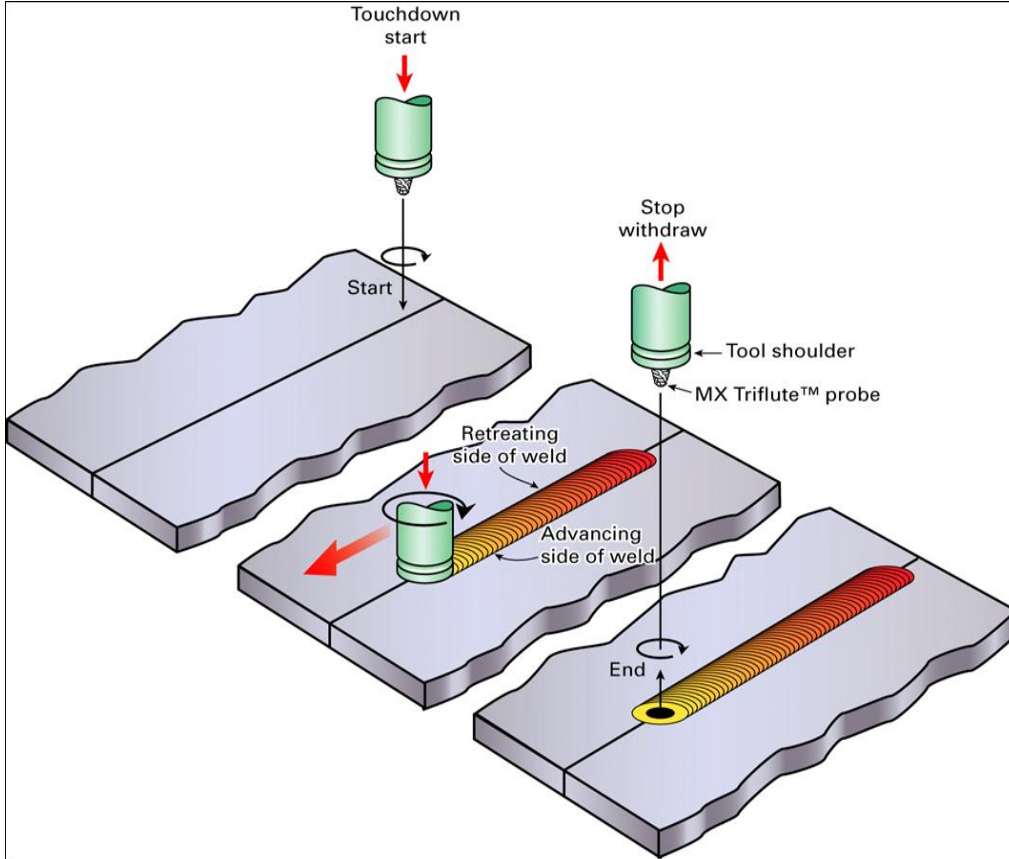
1 Explanation of the Friction Stir Welding Process, [5]
